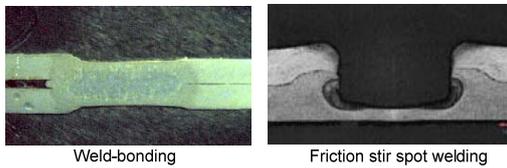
Cross-section of hybrid spot welded joint
